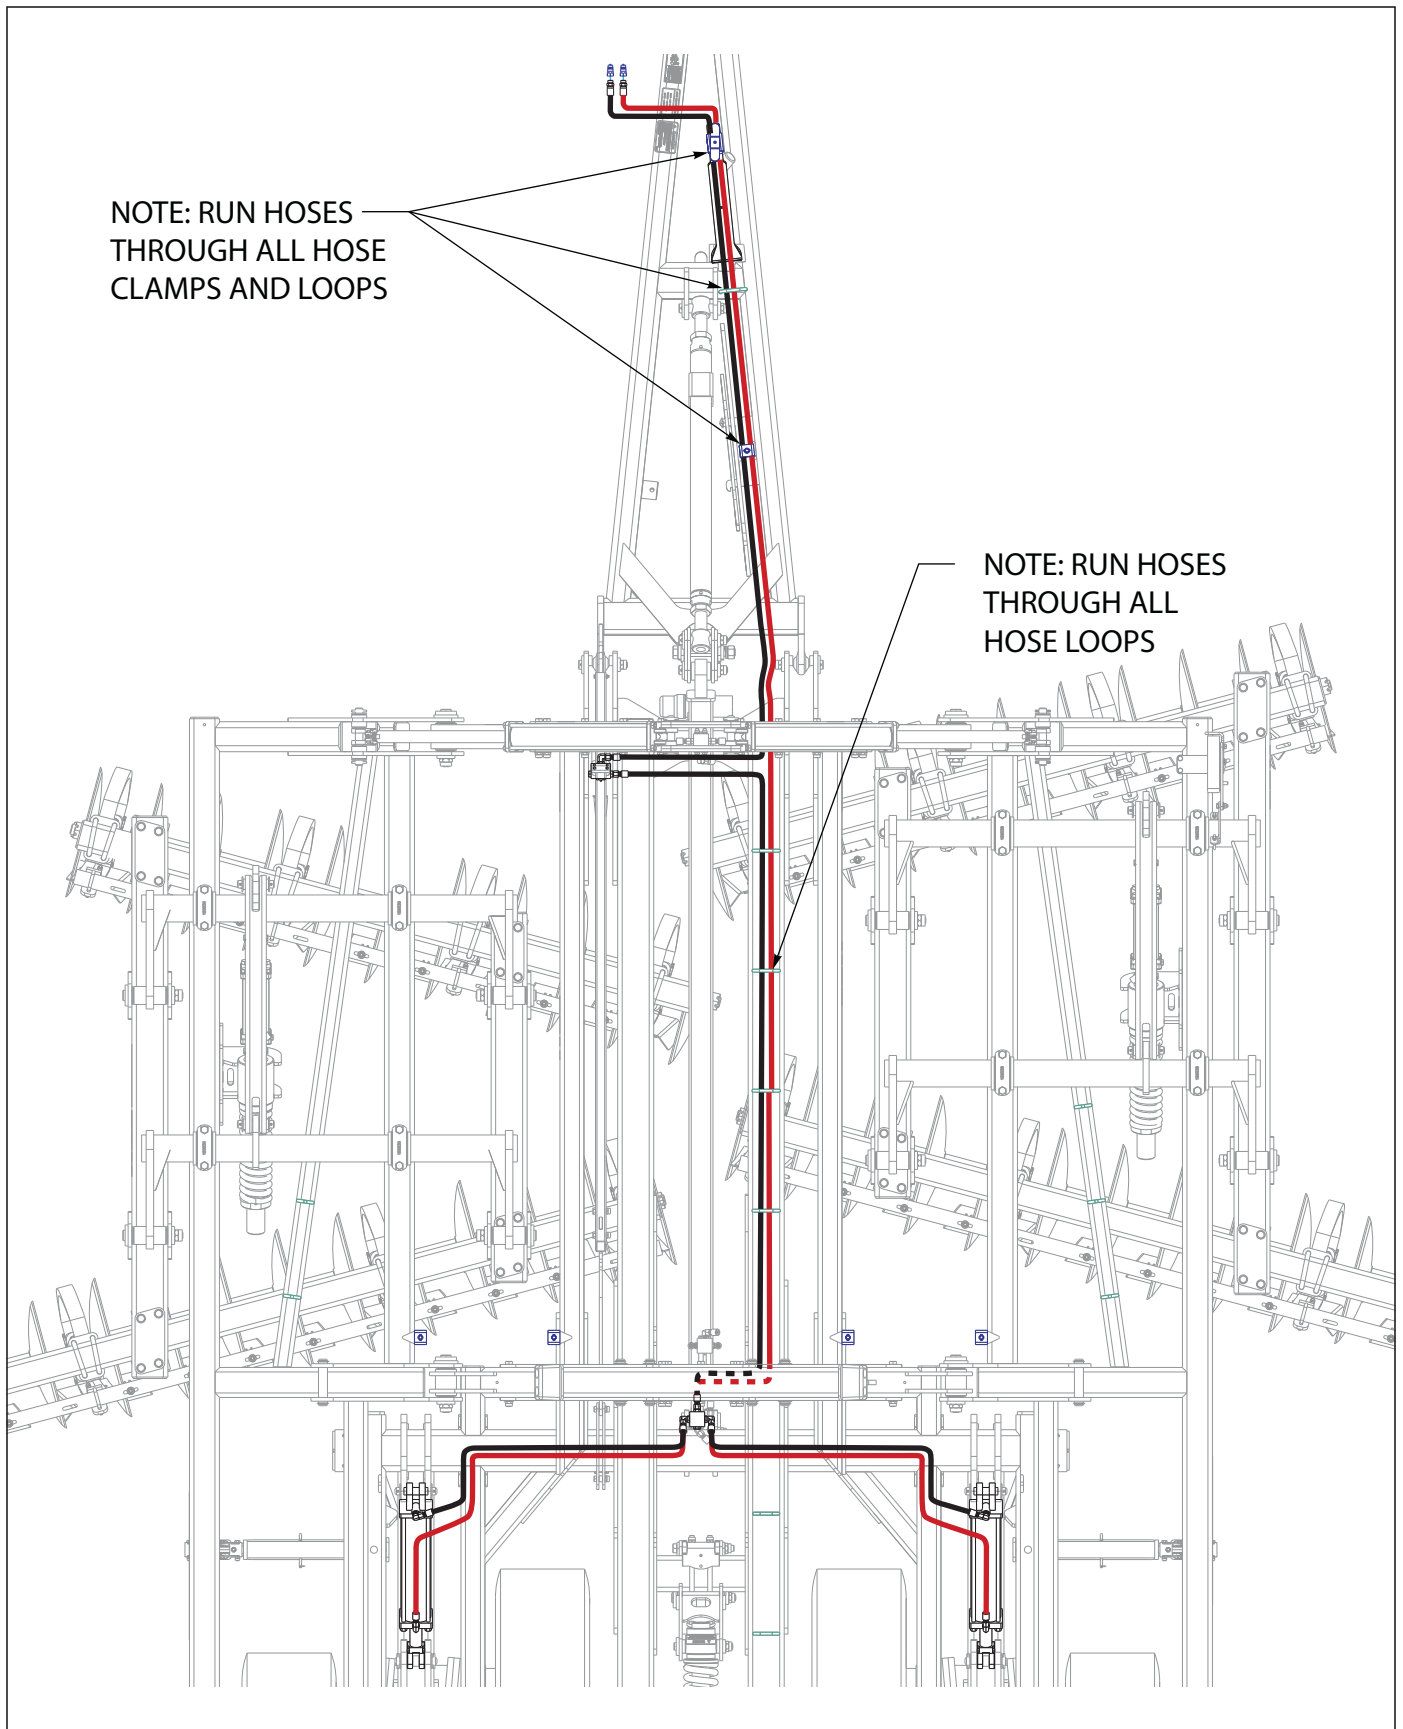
Hydraulic Lift Layout 2411AFG-07-09
